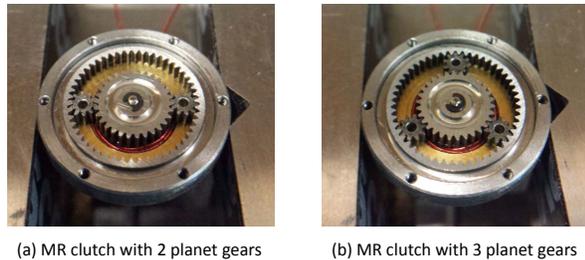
An assembled prototype of the "Planetary" MR clutch and its basic dimensions.
